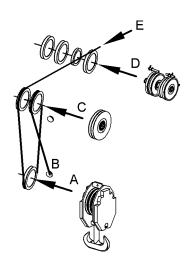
Auxiliary jib (79300 lb) to 2821 boom head section rope reeving system (load position 2)
